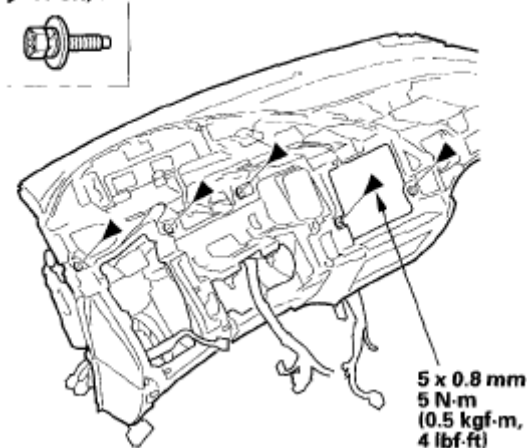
Removing Dashboard/Steering Hanger Beam Bolts (With Specifications)
